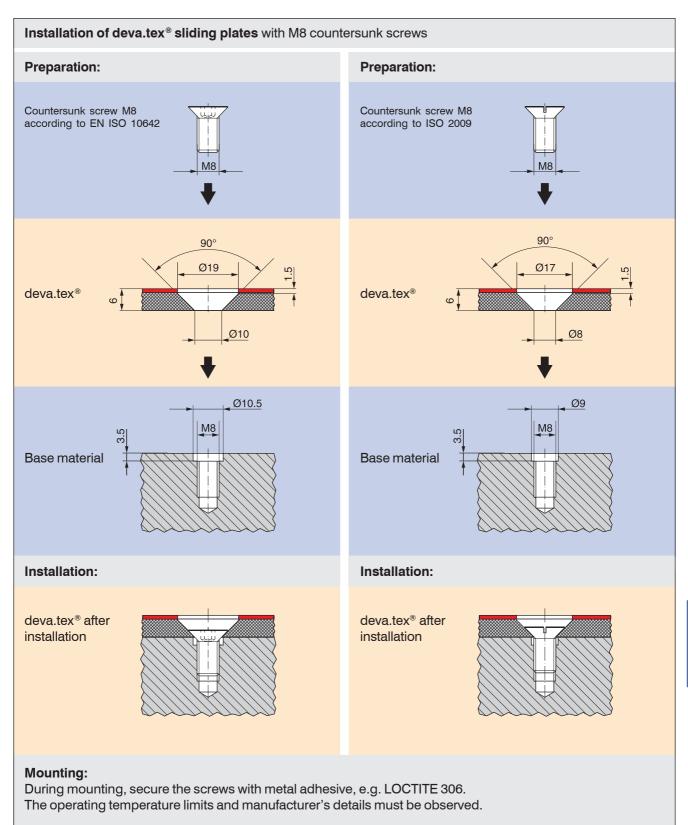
Installation of deva.tex® sliding plates with countersunk screws
